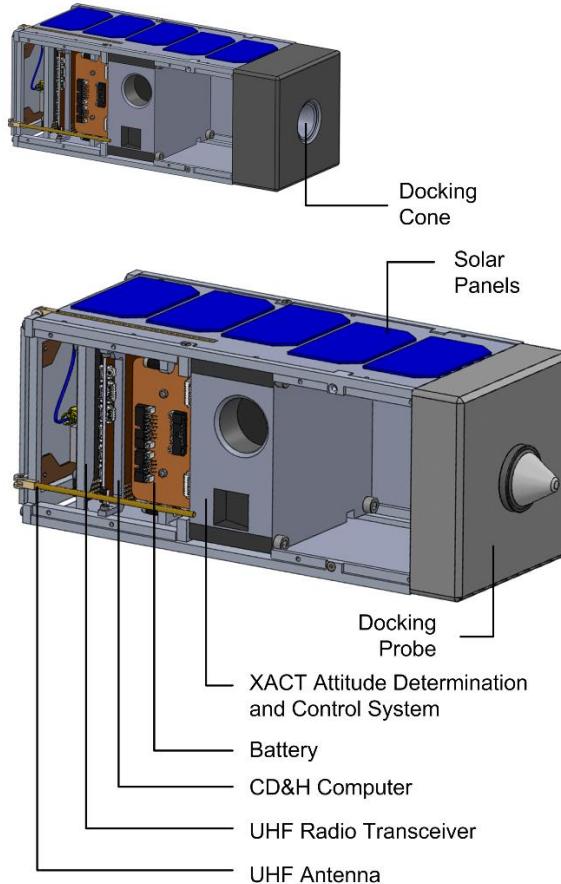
CAD Drawing of Docking Cone and Probe CubeSats.
